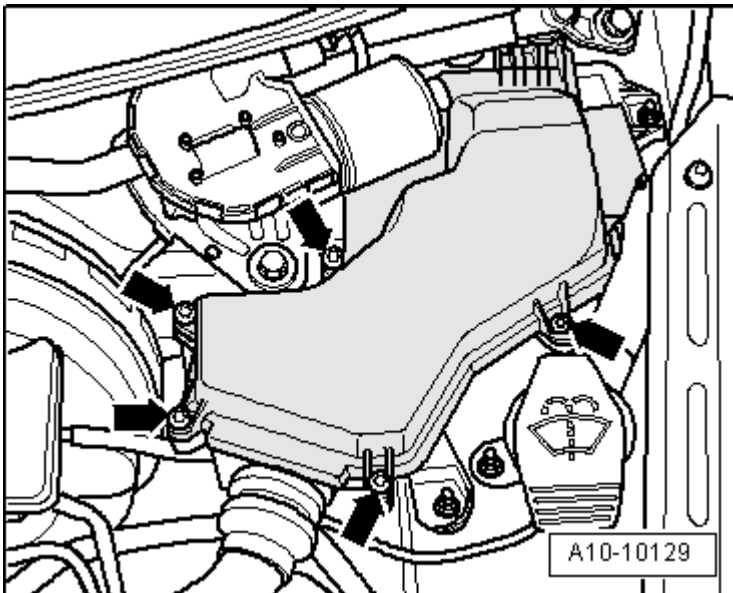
Removing Bolts And Cover Form E-Box At Left In Engine Compartment
